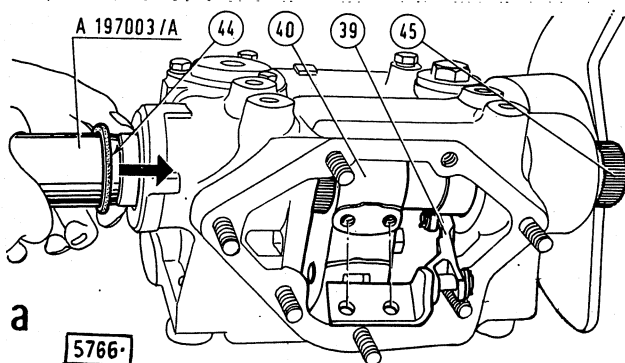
Removing the rocker shaft from the hydraulic lift unit.
